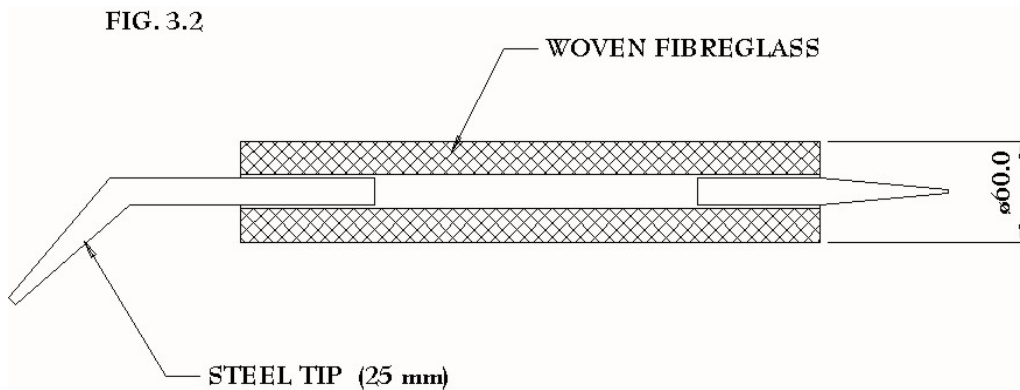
Layout of lightweight pinch bar with manufactured bar.
